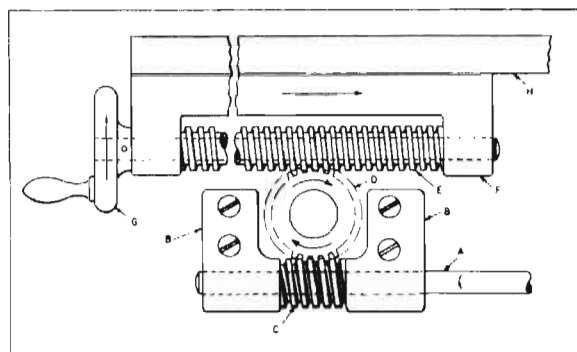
Table feed mechanism that eliminates manual re-engagement of the clutch and feed-screw.
